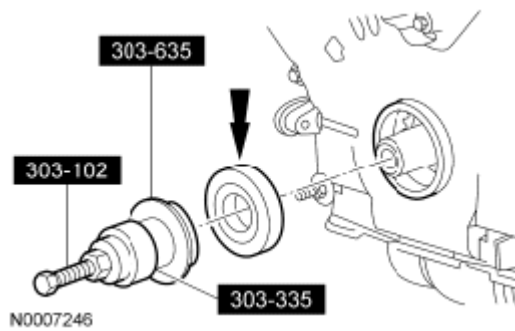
Installing Crankshaft Front Seal Into Engine Front Cover
